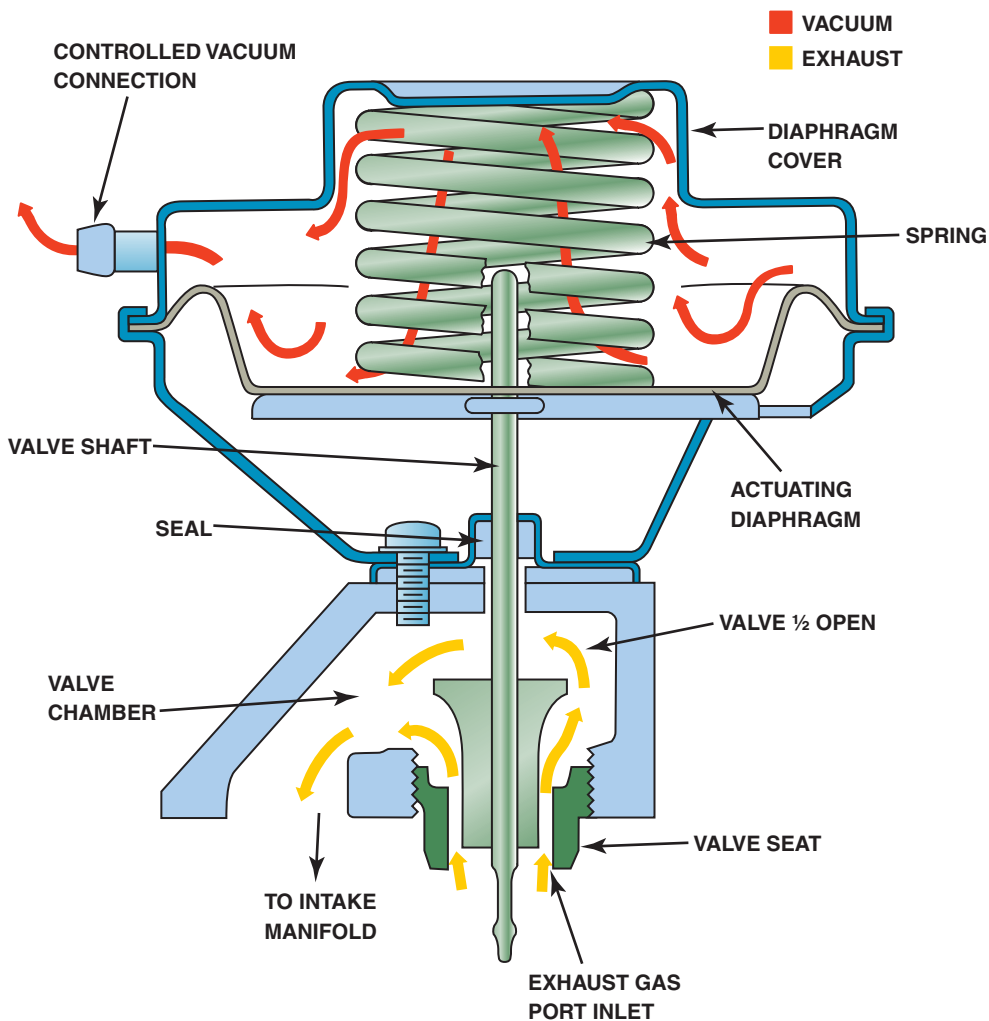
When the EGR valve opens, the exhaust gases flow through the valve and into passages in the intake manifold.
